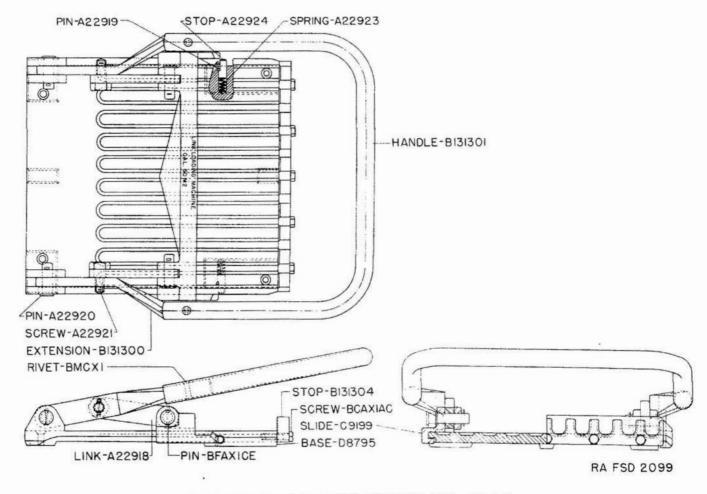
LINK LOADING MACHINE, CAL. .50, M2
